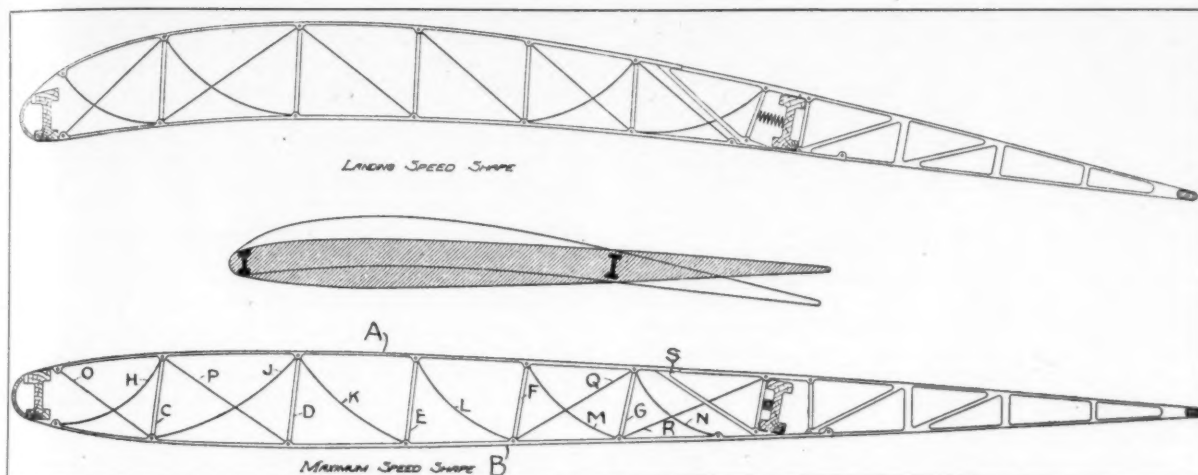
CONSTRUCTIONAL DETAILS OF THE VARIABLE CAMBER WING AND ITS TWO EXTREME POSITIONS
